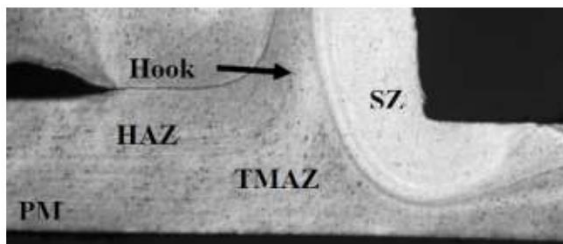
Front Subframe joining with friction stir welding
